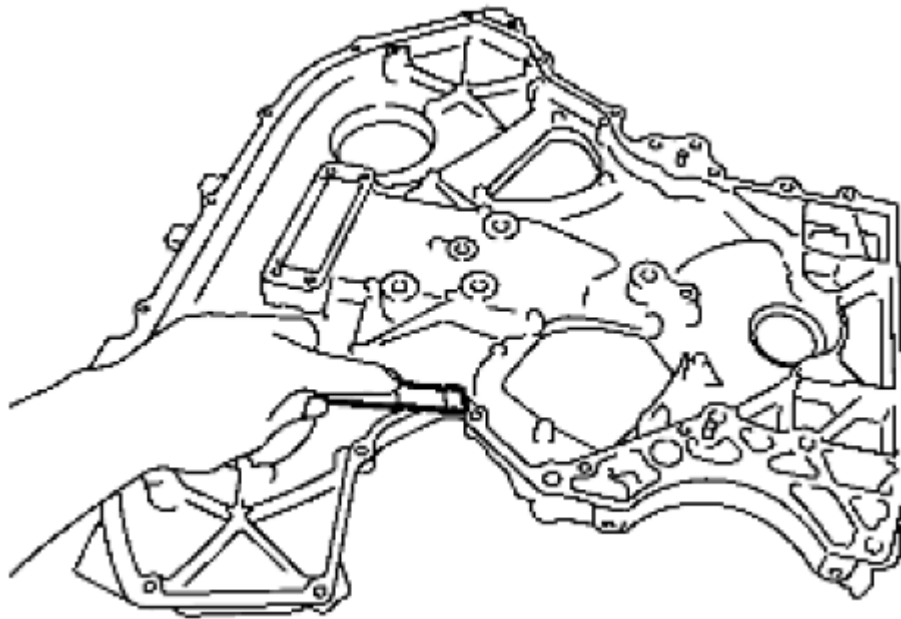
Identifying O-Ring (Right Bank/Left Bank)
